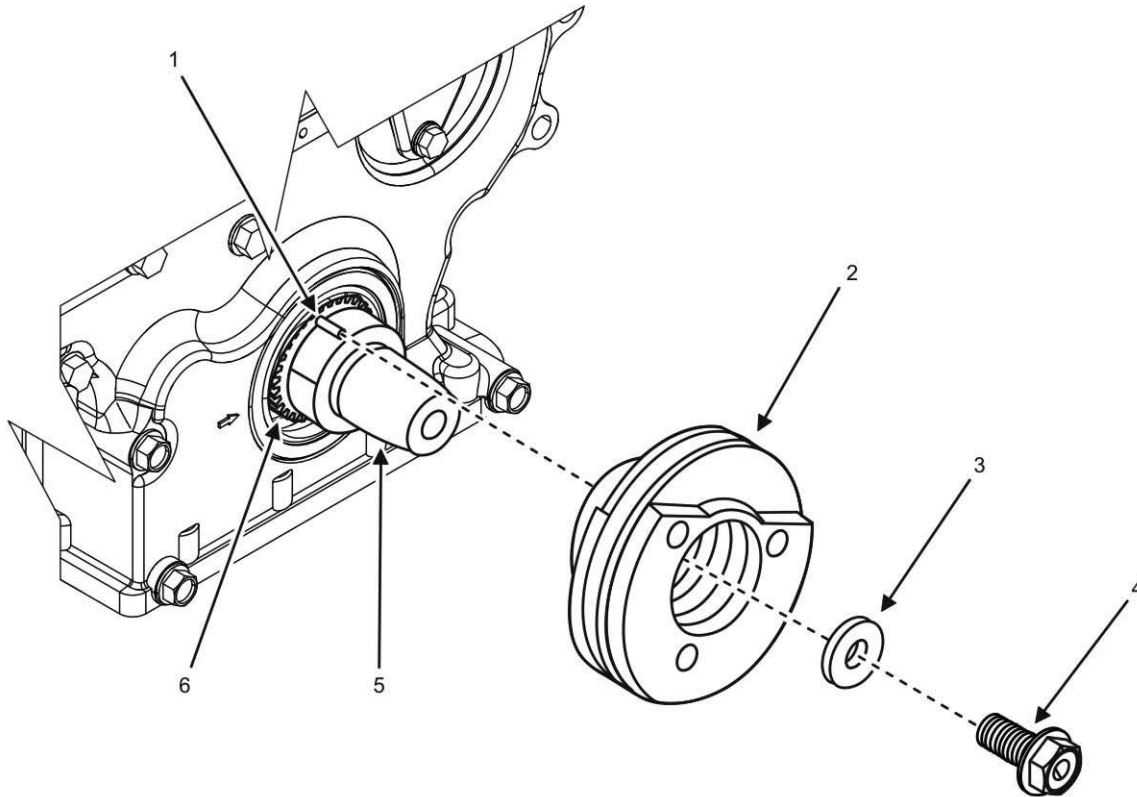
Harmonic Balancer Crankshaft — Alignment.
